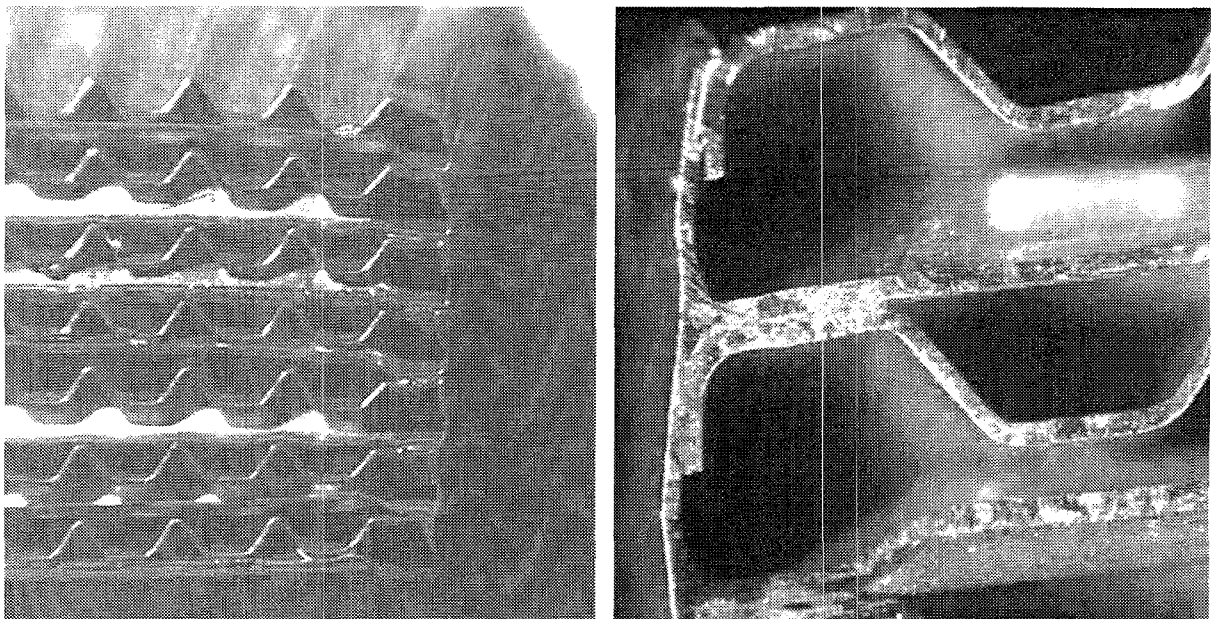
Laser welding of a spiral recuperator (courtesy of ACTE).
